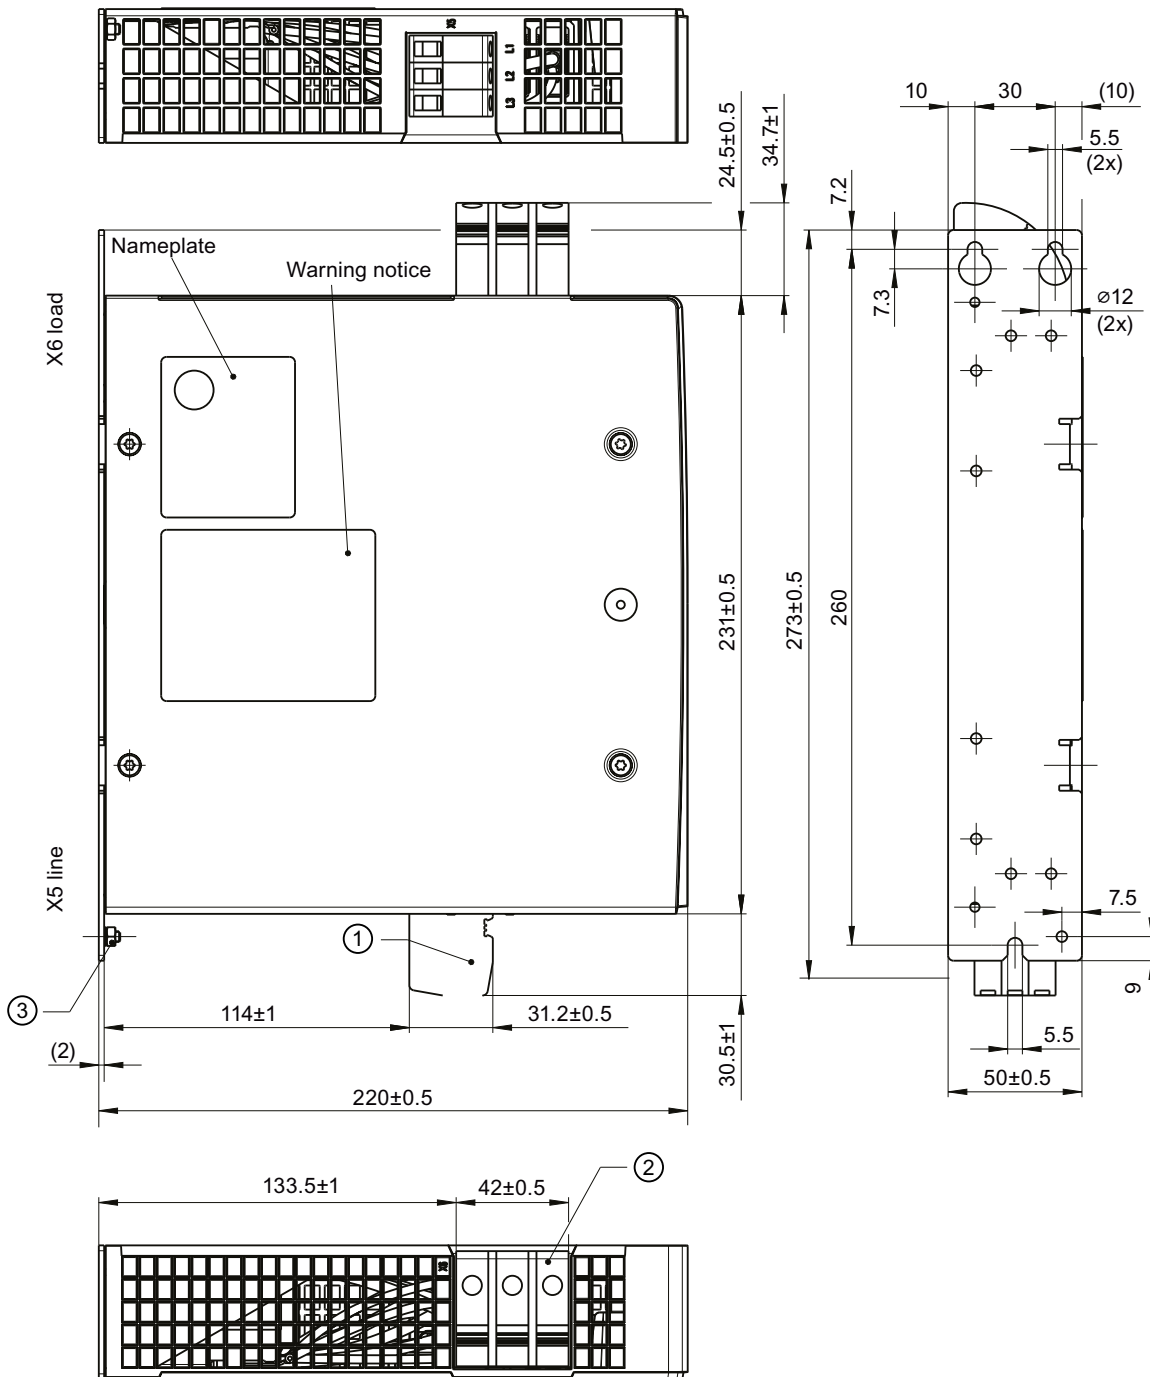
Dimension drawing for the line filter for 1 AC converters
